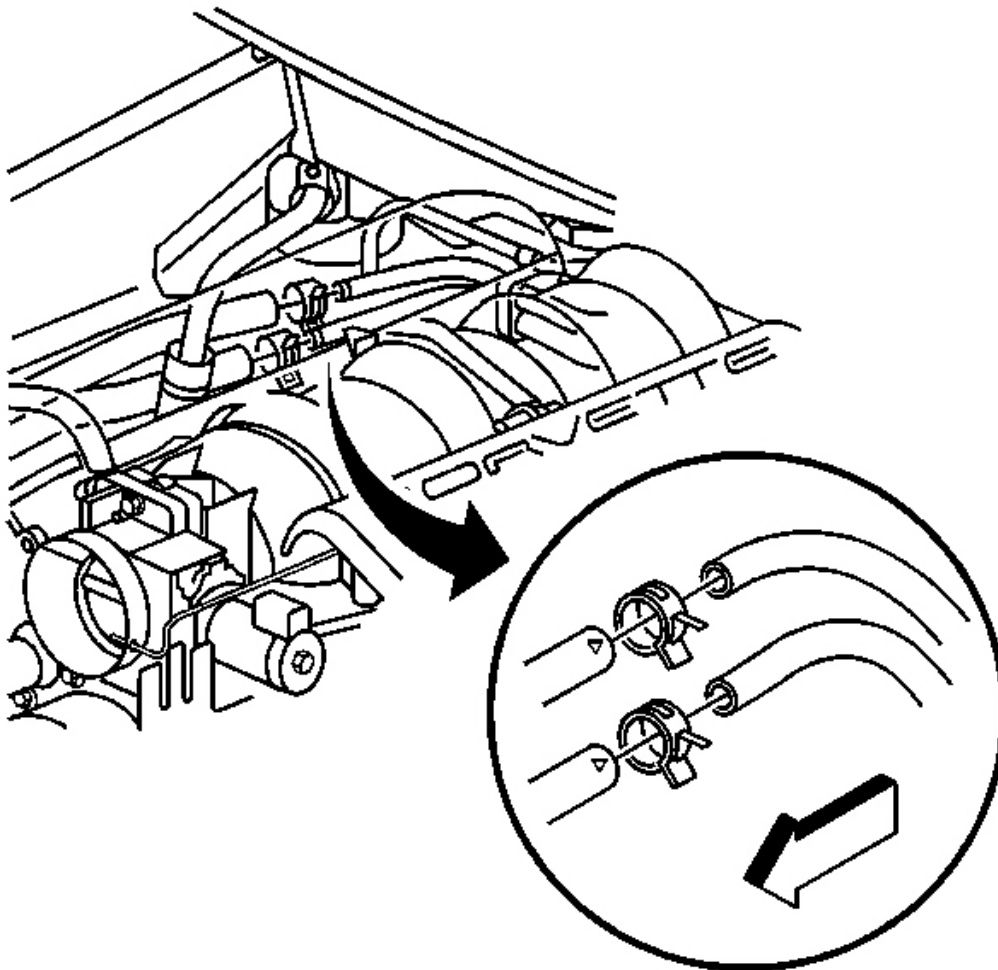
RH Air Injection Check Valve & Hose Clamp
